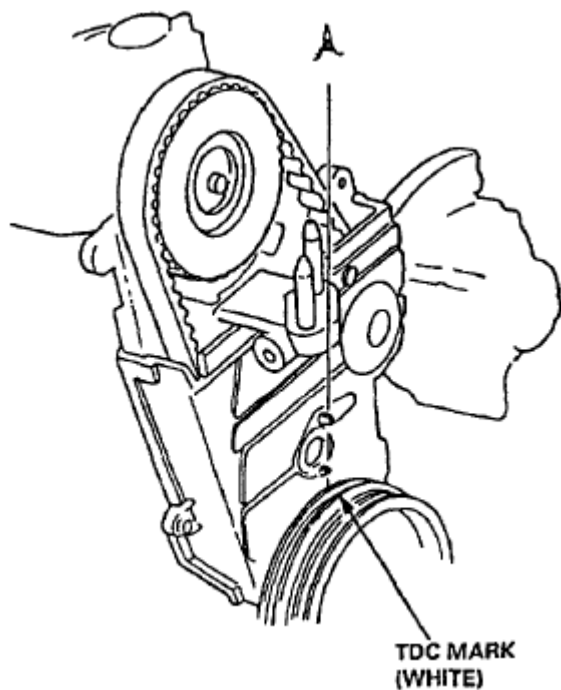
Identifying Crankshaft Pulley And TDC Mark
